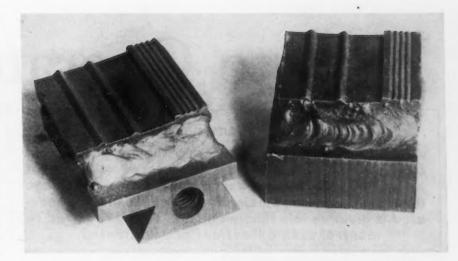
Two band grooving tools for 75 mm. shells, with $1/2 \times 11/2 \times 2$ in. high speed steel sections are welded to a carbon steel dovetail. Formerly such tools were made of solid H.S.S., $1\frac{3}{4} \times 2\frac{1}{8} \times 2\frac{1}{2}$ in. in section and were subject to frequent breakage in the dovetails. The solid tool cost \$45; the welded composite one, \$25.
